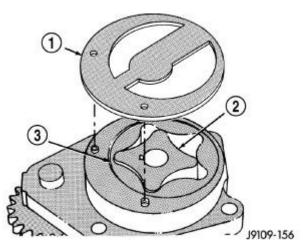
Oil Pump Back Plate, Gerotor & Gerotor Planetary Courtesy of CHRYSLER GROUP, LLC
